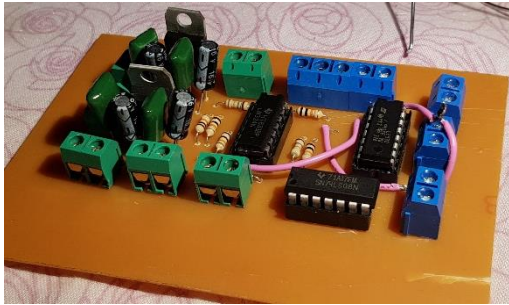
PCB of the Motor Driver, Stop Condition and Power Supply Circuit
